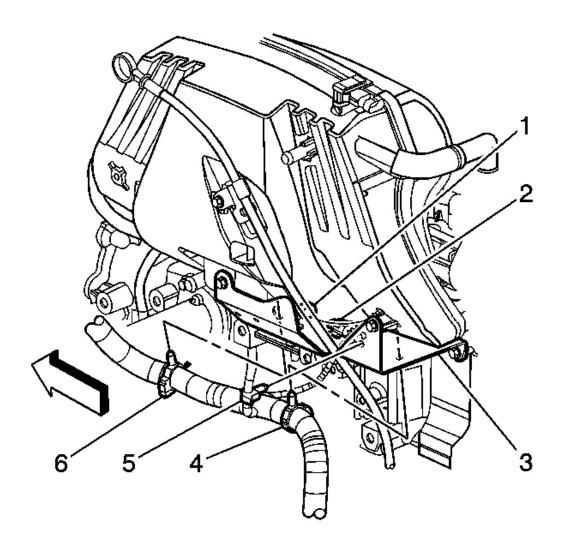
View Of Wiring Harness Retainers Courtesy of GENERAL MOTORS CORP.
